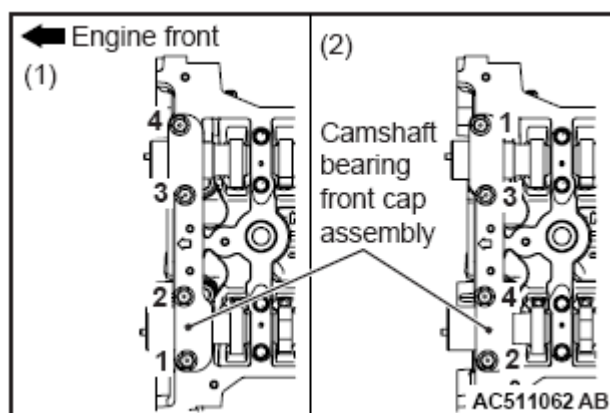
Tightening Camshaft Bearing Front Cap Mounting Bolts
